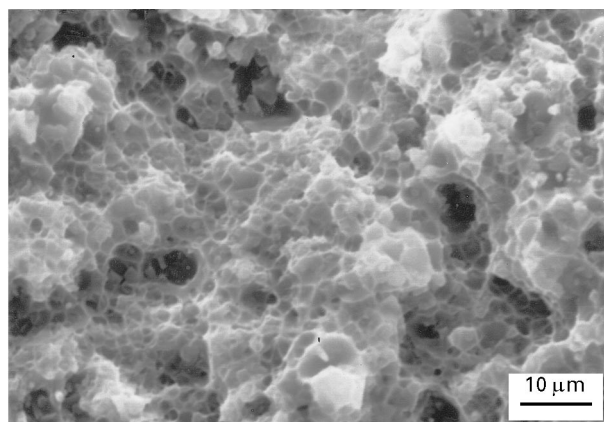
Fracture surface of tensile specimen of 6061/SiC composite after 2000 cycles up to 220 °C.
